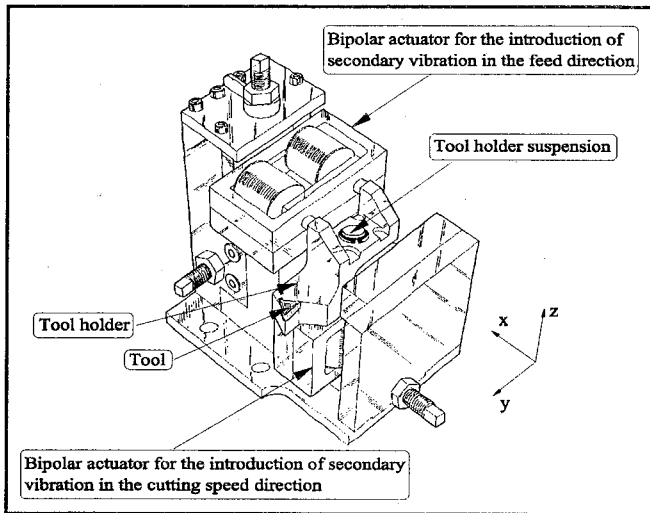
Tool holder with integrated actuators for the control of tool vibration in the metal cutting process.⁹
